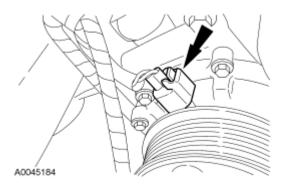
Engine Wiring Harness Retainers Courtesy of FORD MOTOR CO.
